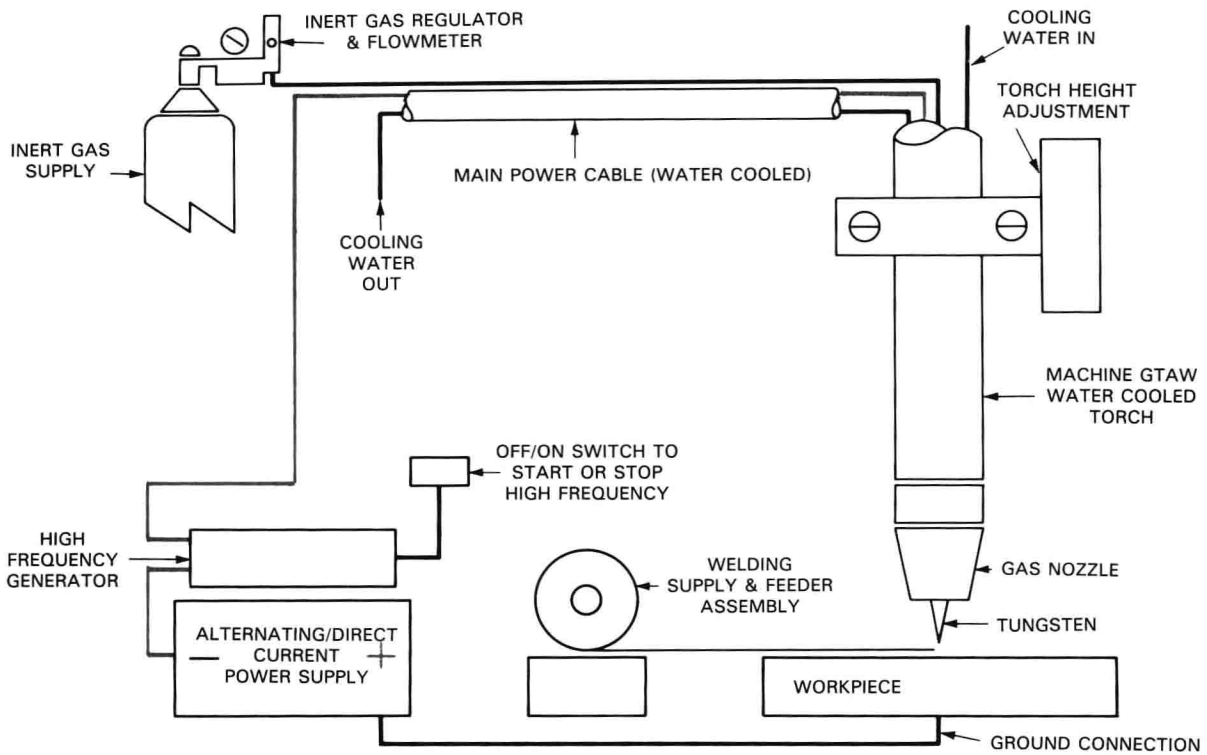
Welds made with this semiautomatic type of equipment can be made much faster with less defects than manual welds. A wire supply and feeder assembly provide filler material.
